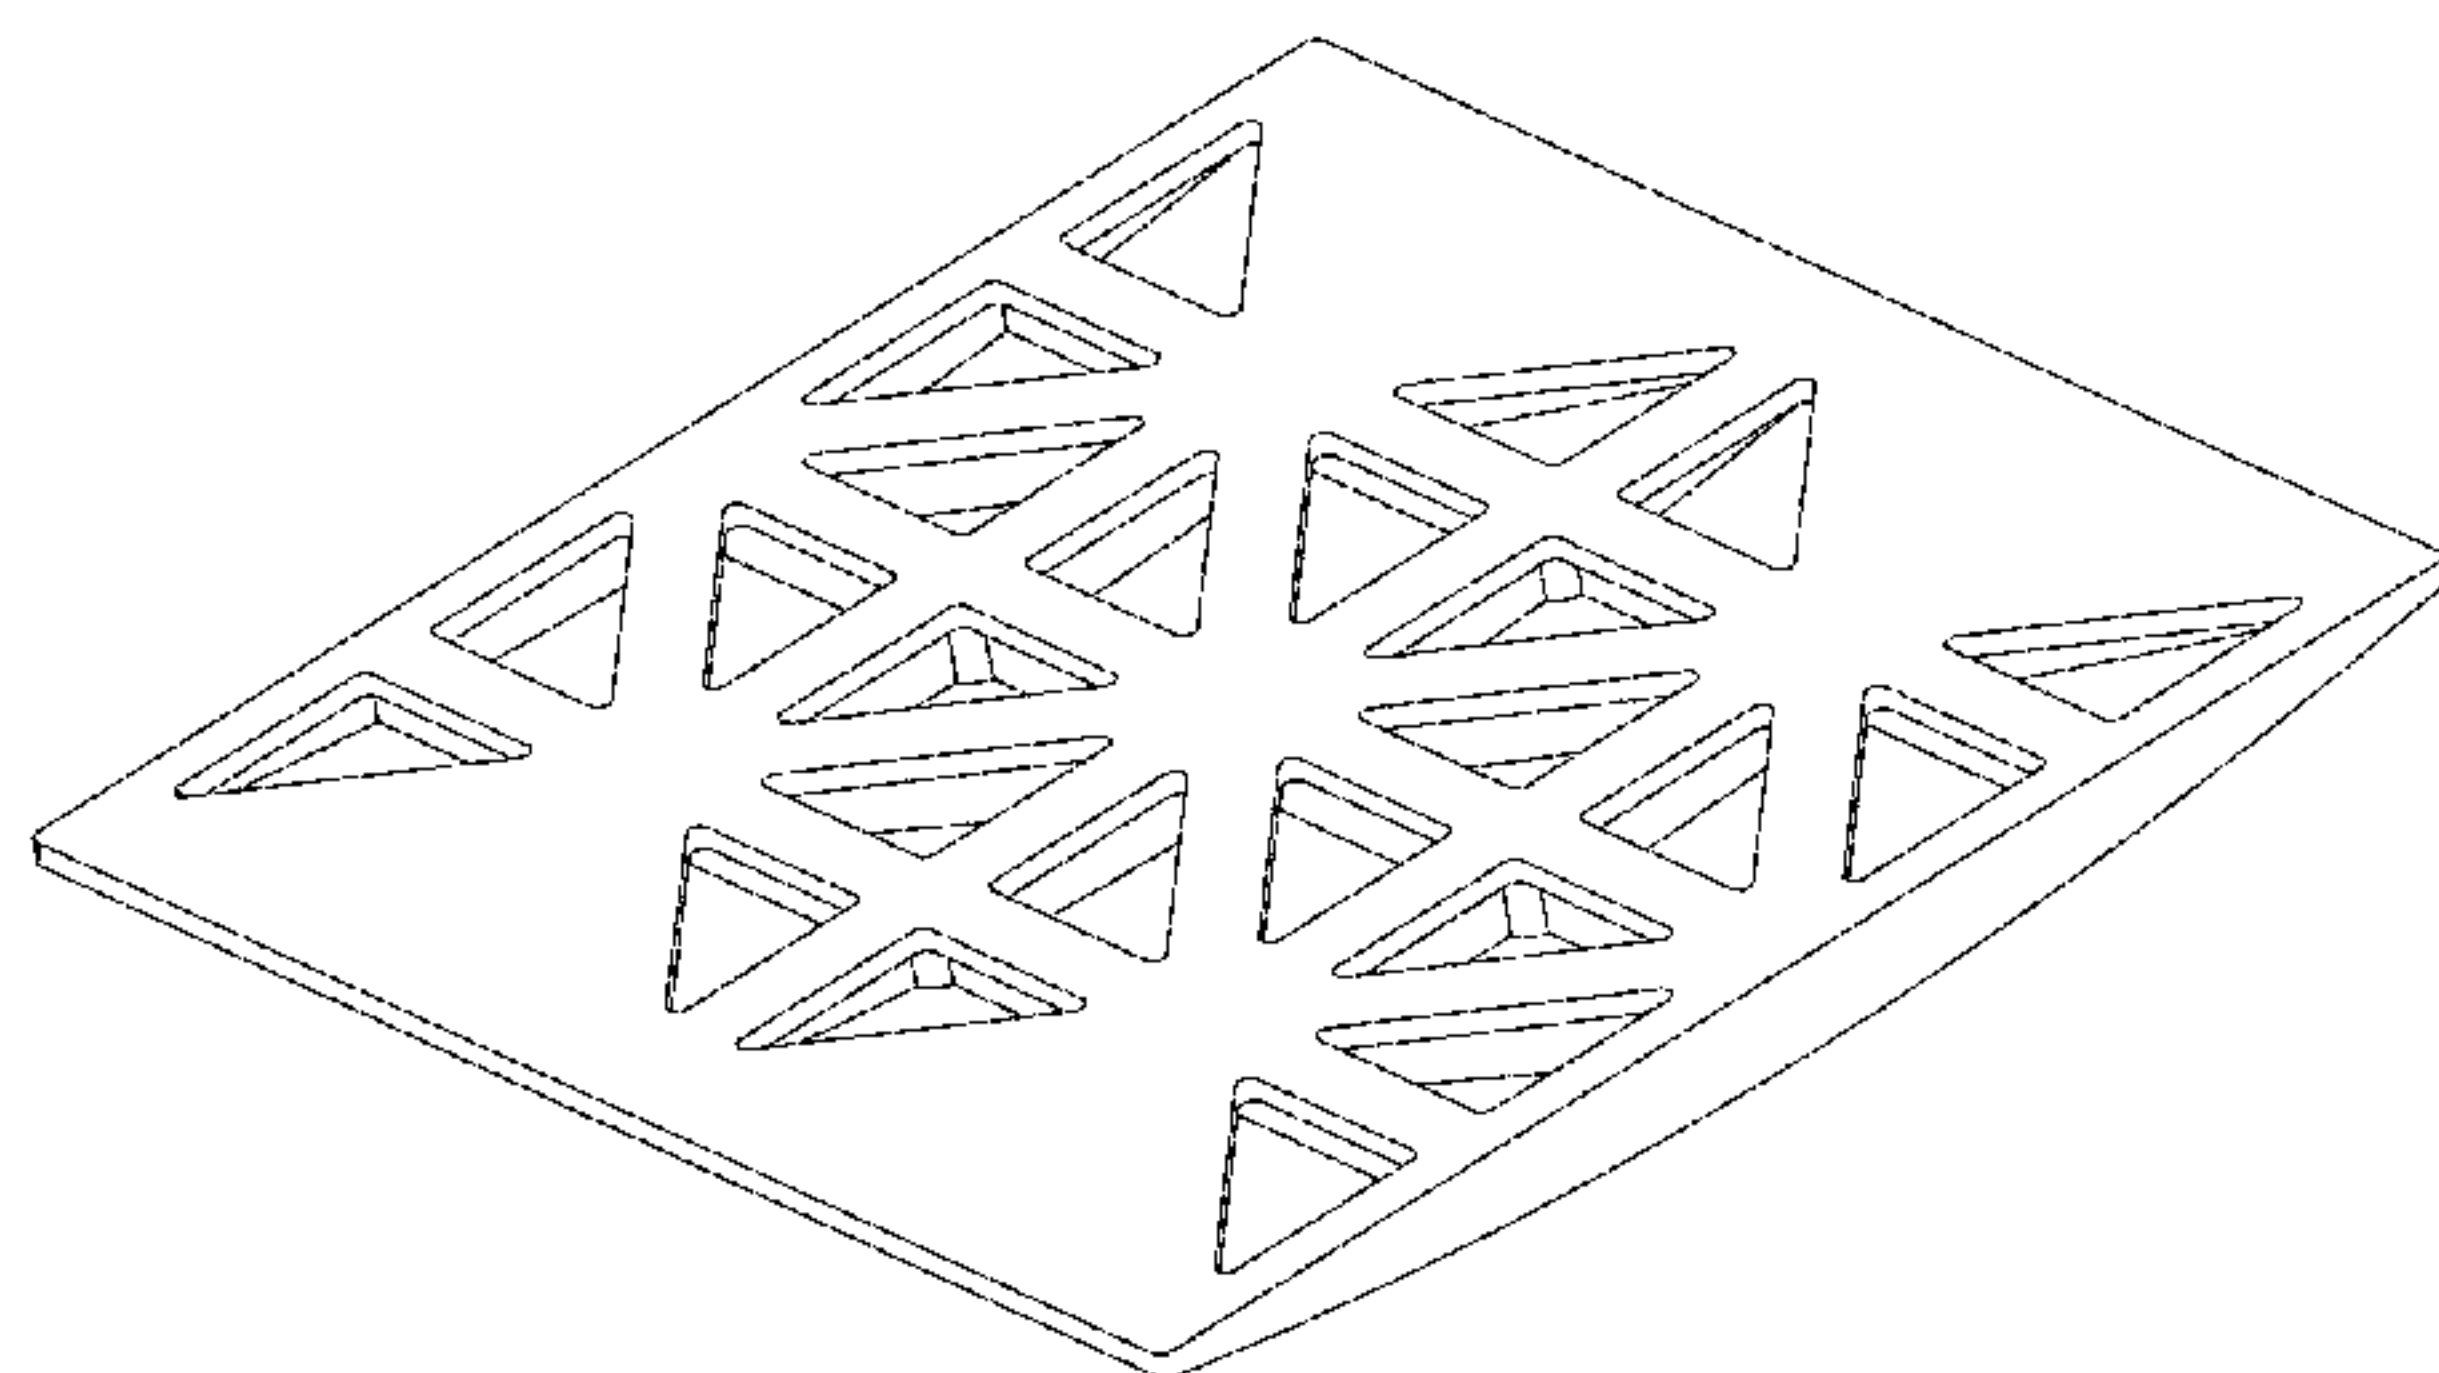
is a front view of the wheelchair rigidizer of FIG. 9;
